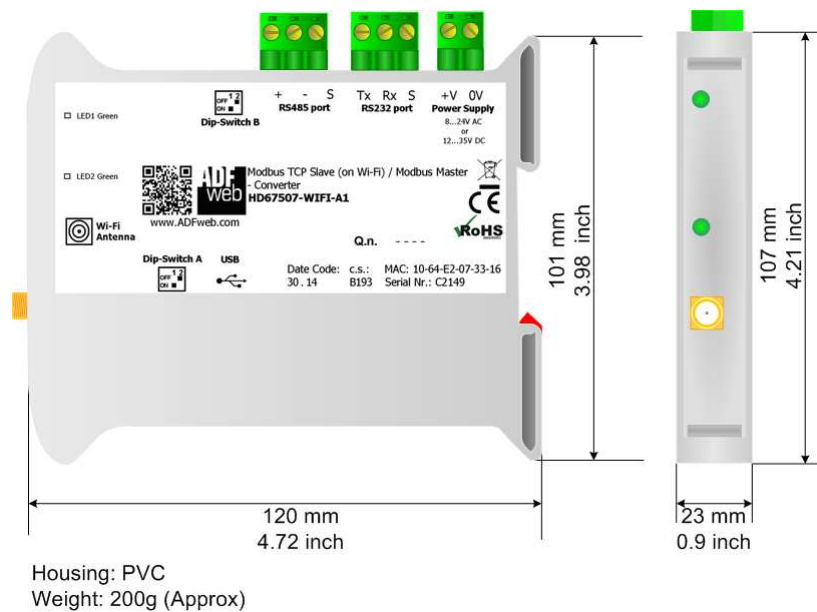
Mechanical dimensions scheme for HD67507-WiFi-A1
